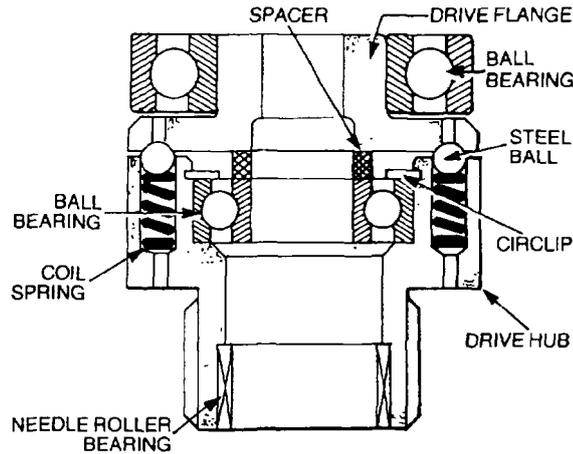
Removing the Winch Drive Flange, Bearing and Oil Seal
